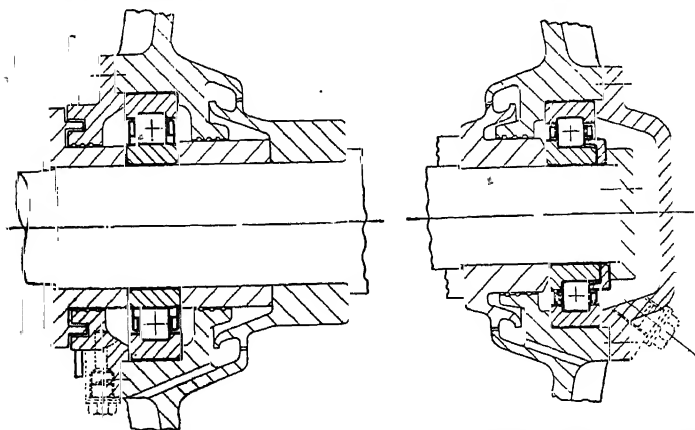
A modern traction-motor bearing arrangement designed for easy dismantling.
